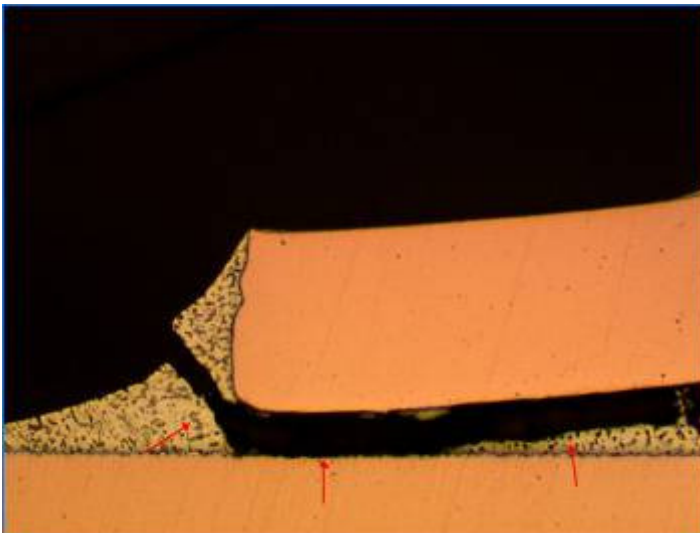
cross section, SN67, U31, left lead solder crack, 200xa
